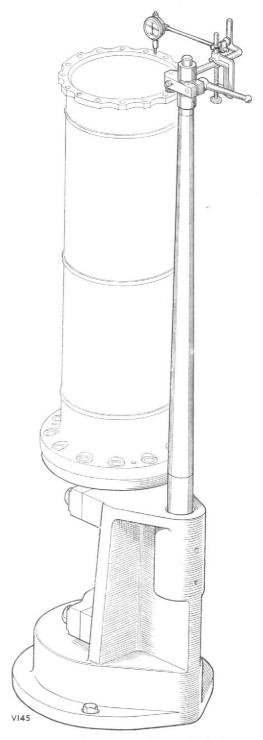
Using fixture T.70438 to check the centre shaft for parallelism.
